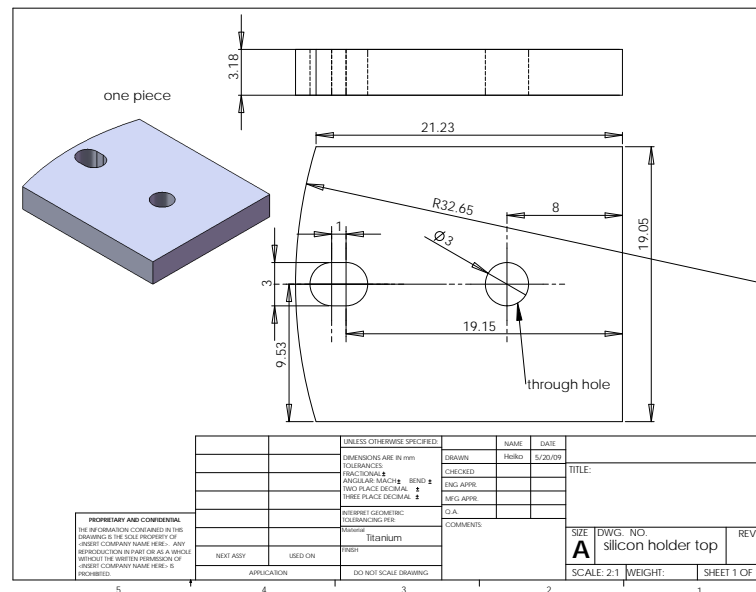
Drawing of the top titanium piece to hold the silicon heater.
